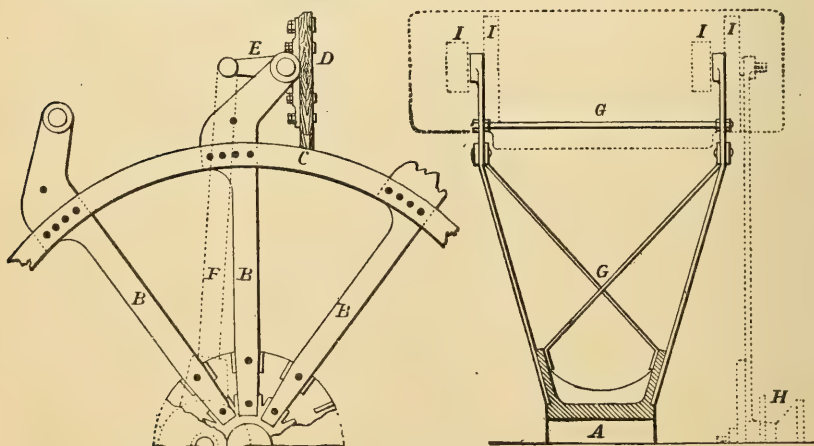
Overhung Feathering Paddle Wheel.—A, Boss. B B, Arms. C, Rim. D, Float. E, Arm for float. F, Driving rod. G G, Stays. H, Eccentric and pin bolted to the sponson. I I, Brackets.
